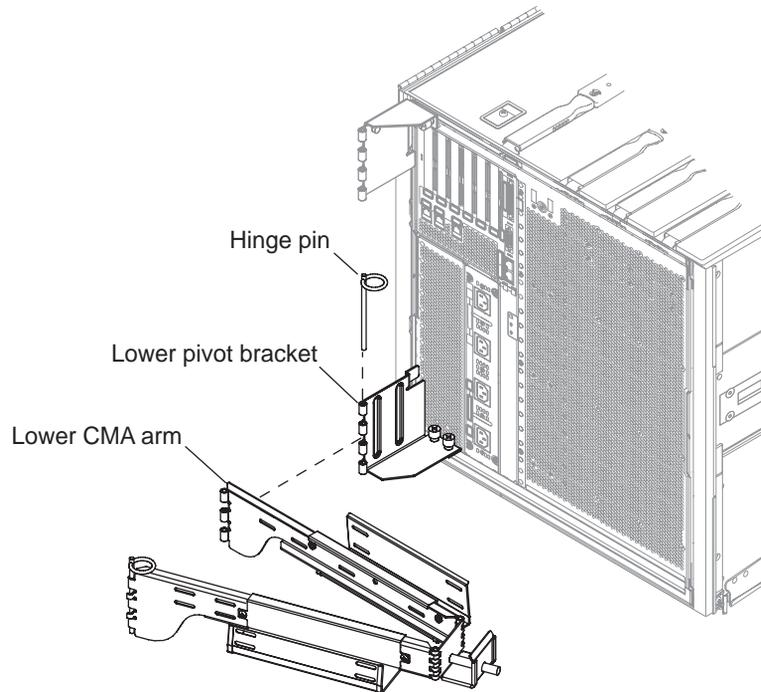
Attaching Lower CMA Arm and Pivot Bracket
